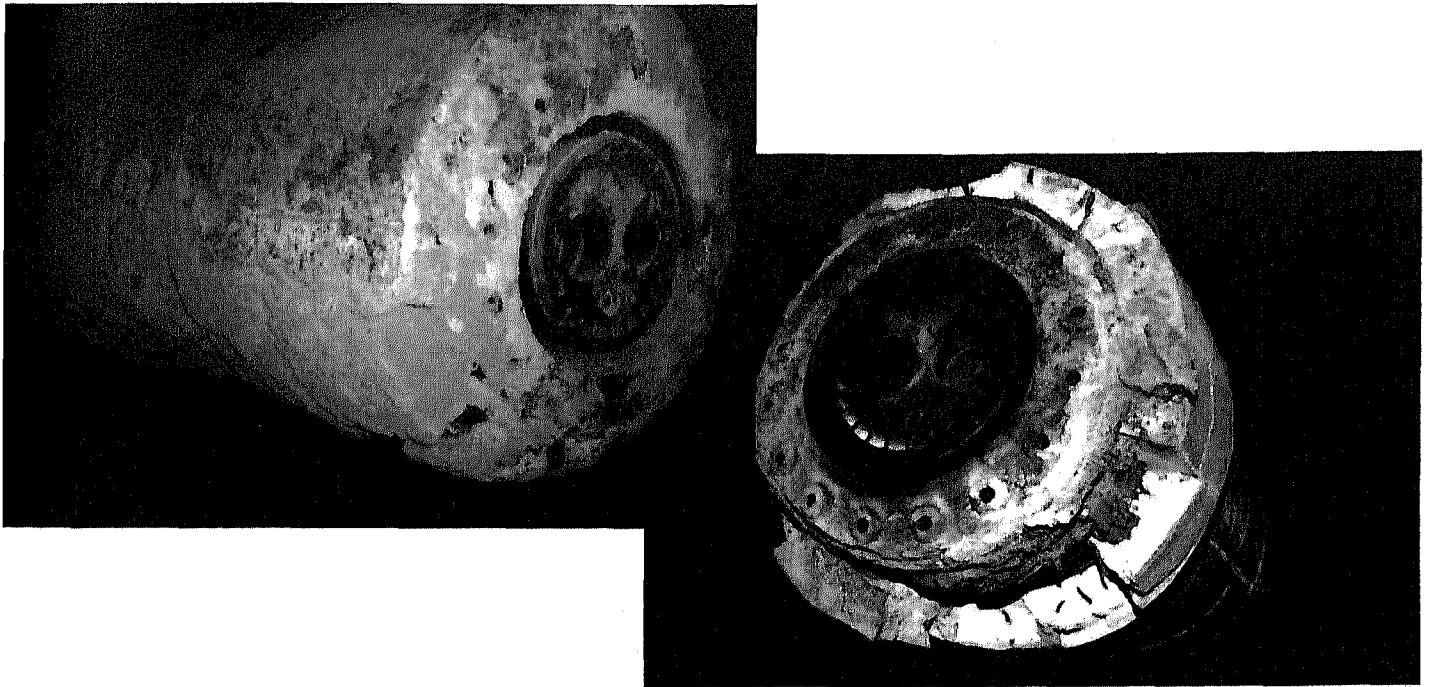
Refractory lining of a cement kiln burner, damaged (right) and stabilised by a cast segment (left)
